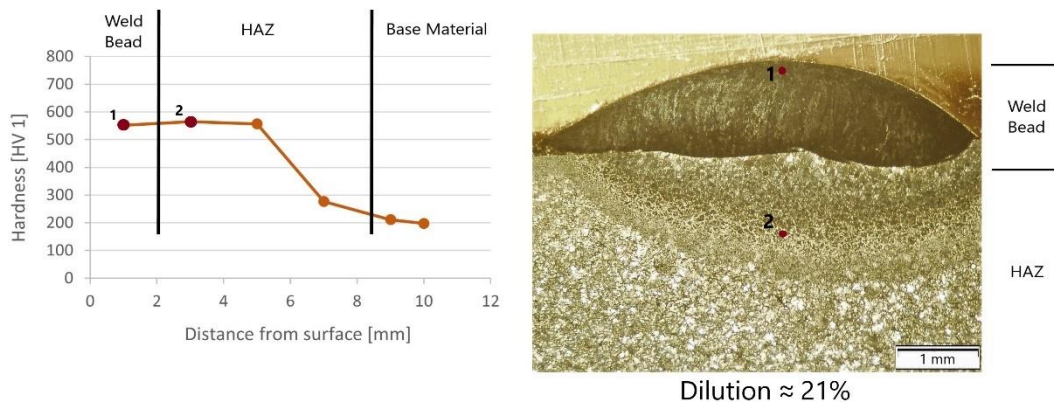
Welding Current: 110A; Welding Speed: 400mm/min; Powder Feed Rate: 20g/min (52)
